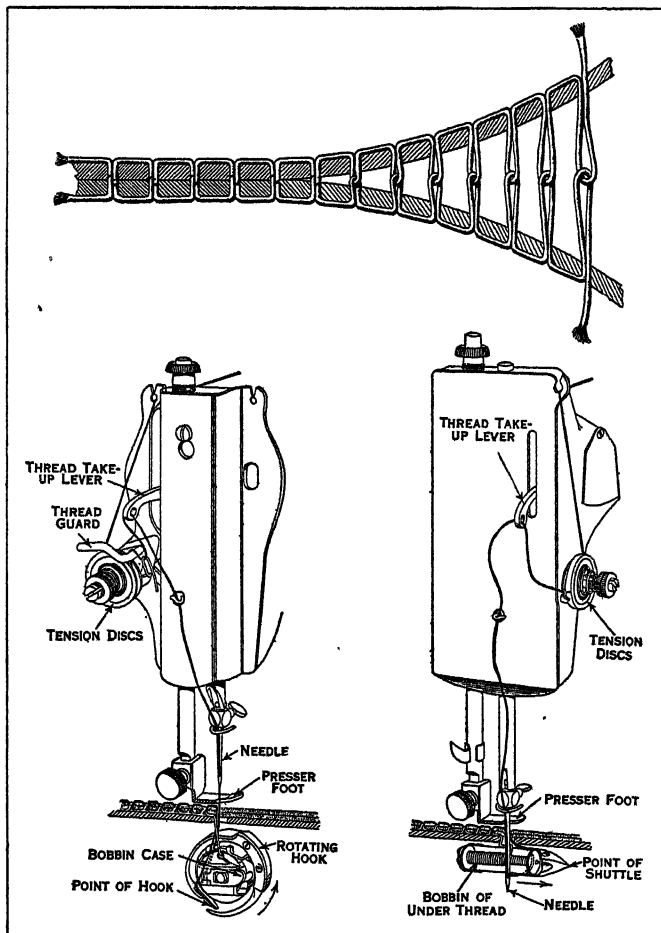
LOCK STITCH AS FORMED ON SINGER SEWING MACHINES. FIG. 2.—THE LOCK STITCH IN FORMATION. THE NEEDLE THREAD IS DEFINED IN BLACK AND THE UNDER THREAD SHOWN WHITE. FIG. 3.—COURSE OF THE THREAD IN A VIBRATING SHUTTLE MACHINE
